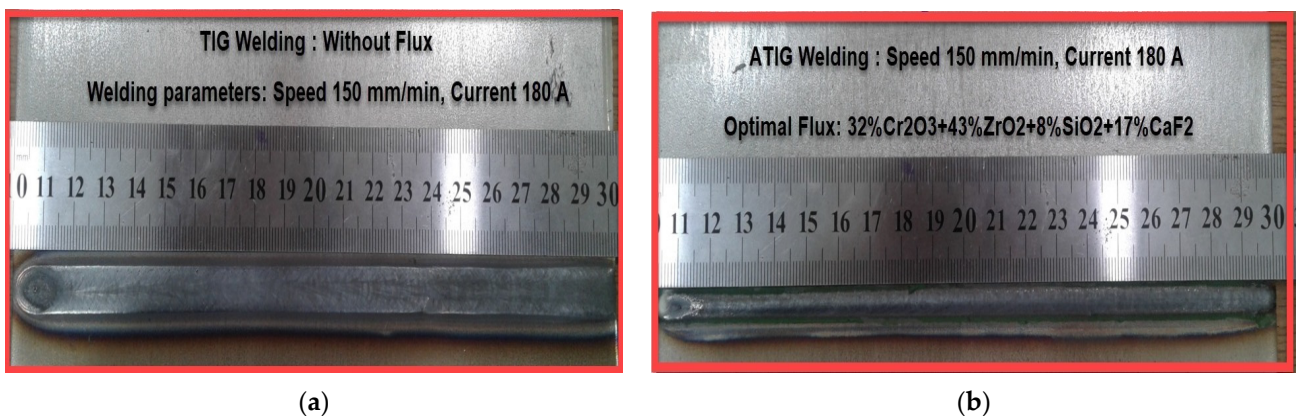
The external weld line appearance for TIG (a) and ATIG (b) weld lines.
